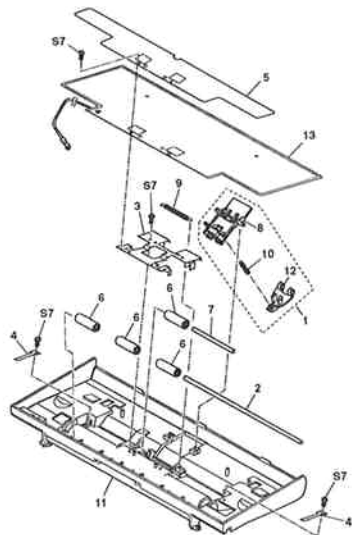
SEPARATION ROLLER & FEED ROLLER
